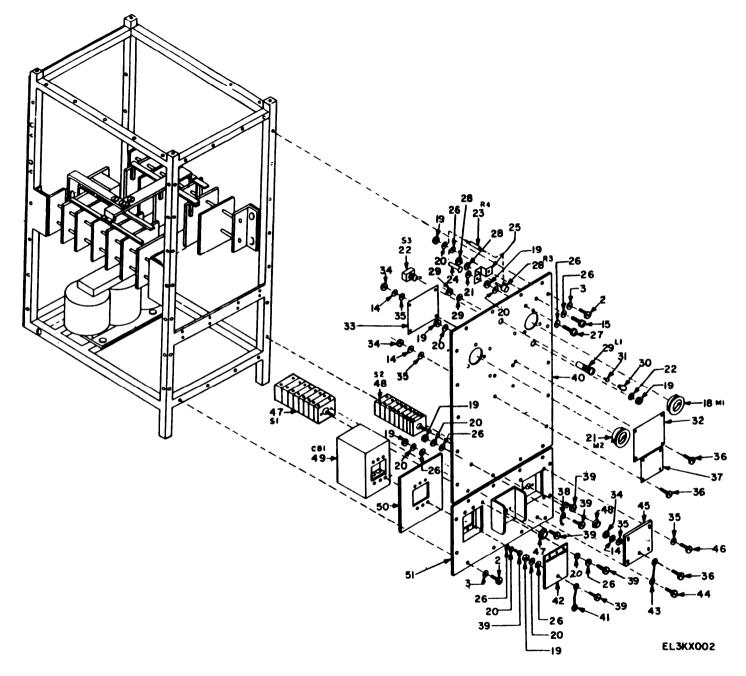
Power Supply PP-4606C/G, Front View (Sheet 2 of 2).
